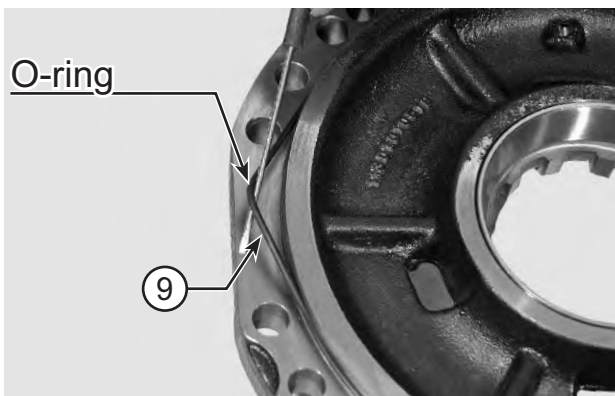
Thoroughly check the condition of the o-ring (9).
